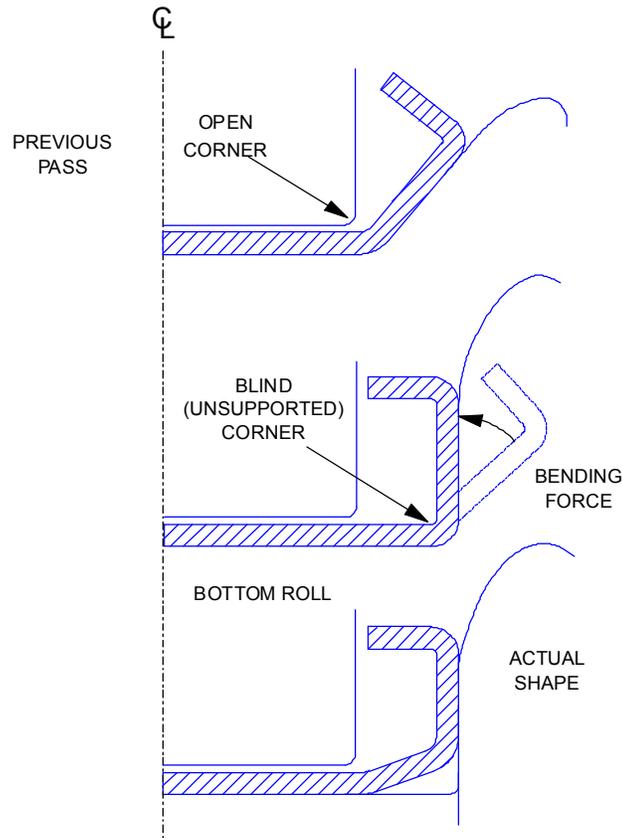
Possible additional bendline at unsupported section
